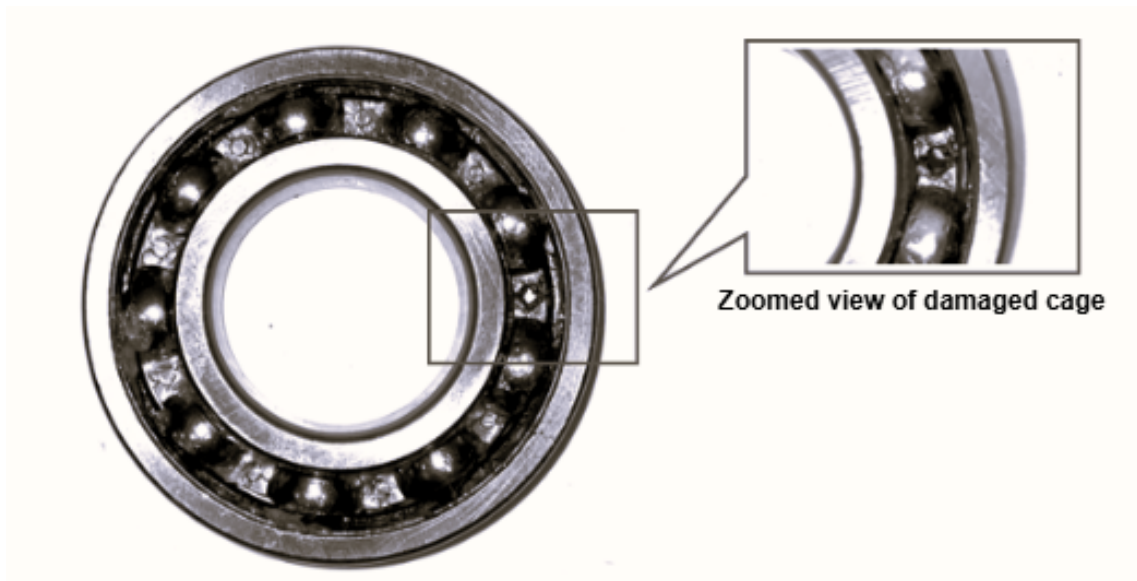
Damaged Cage in Rolling Bearing [13]
